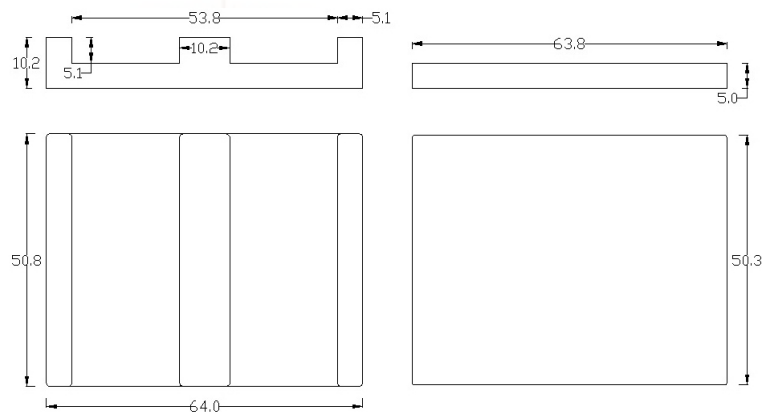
Dimensions of (a) the E64 core and (b) its accompanying I core [27]
